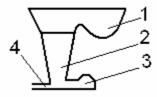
Gating system: 1 – pouring basin; 2 – pouring gate; 3 – slag catcher; 4 – feeder
